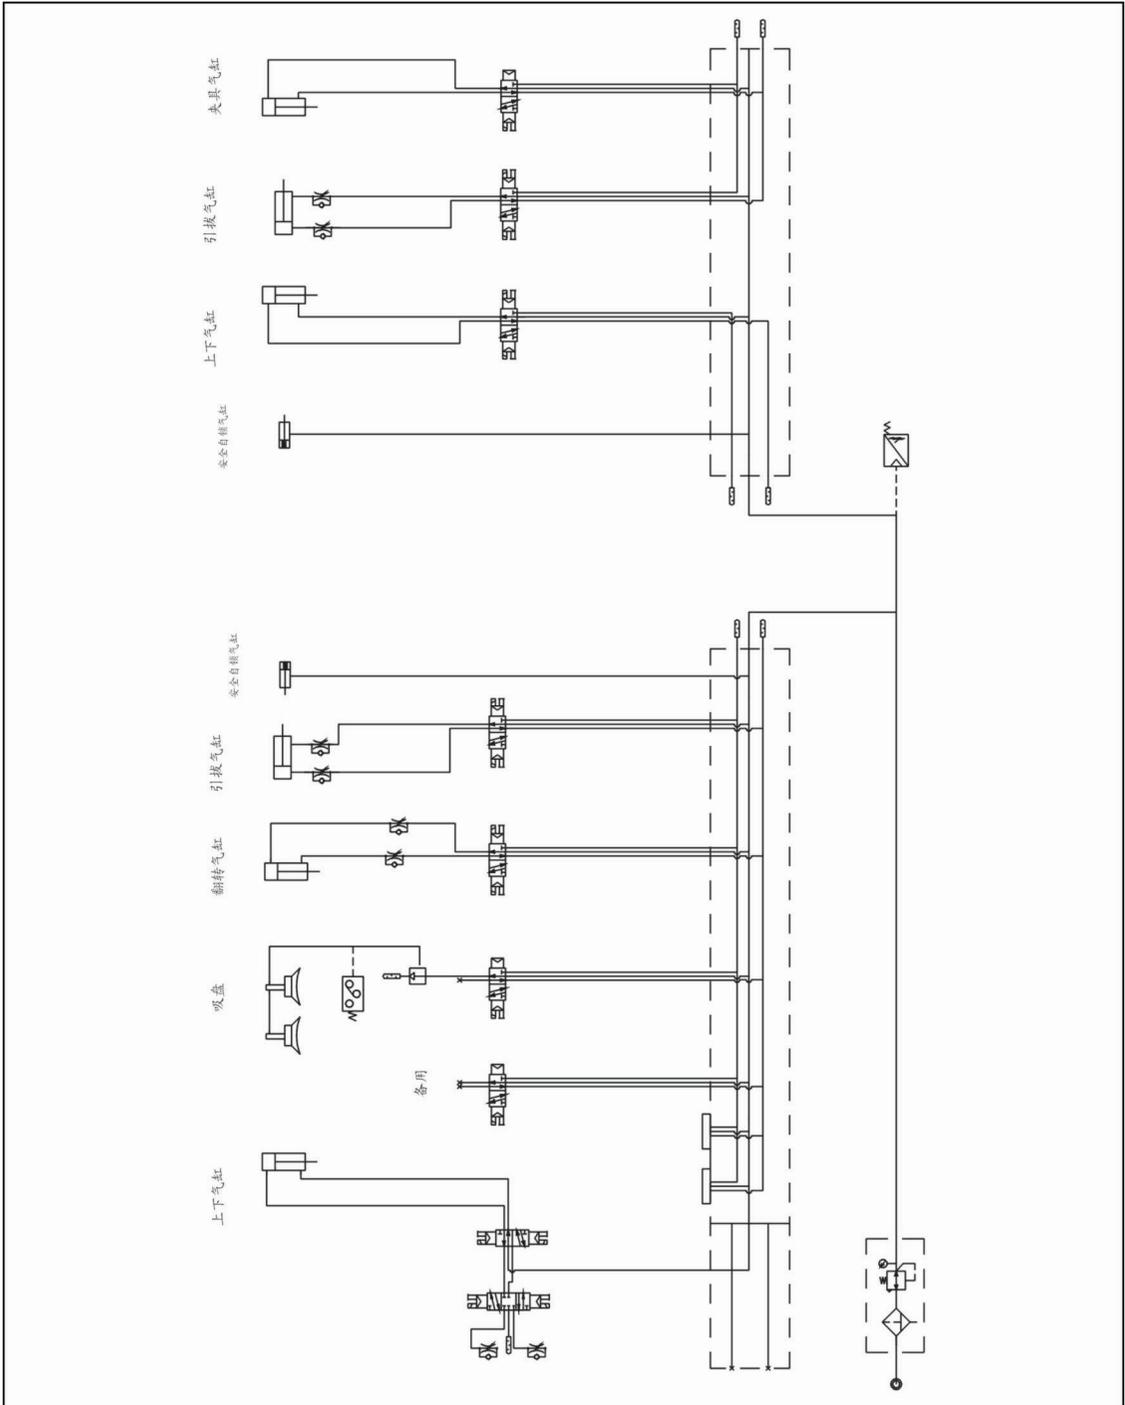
IMM (injection molding machine) Wiring Diagram 1
